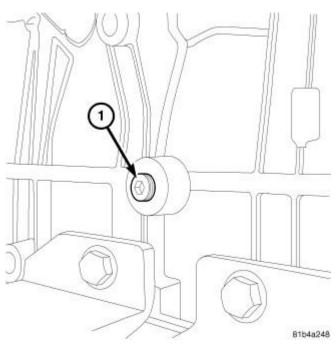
Crank Lock Plug Location Courtesy of CHRYSLER LLC
